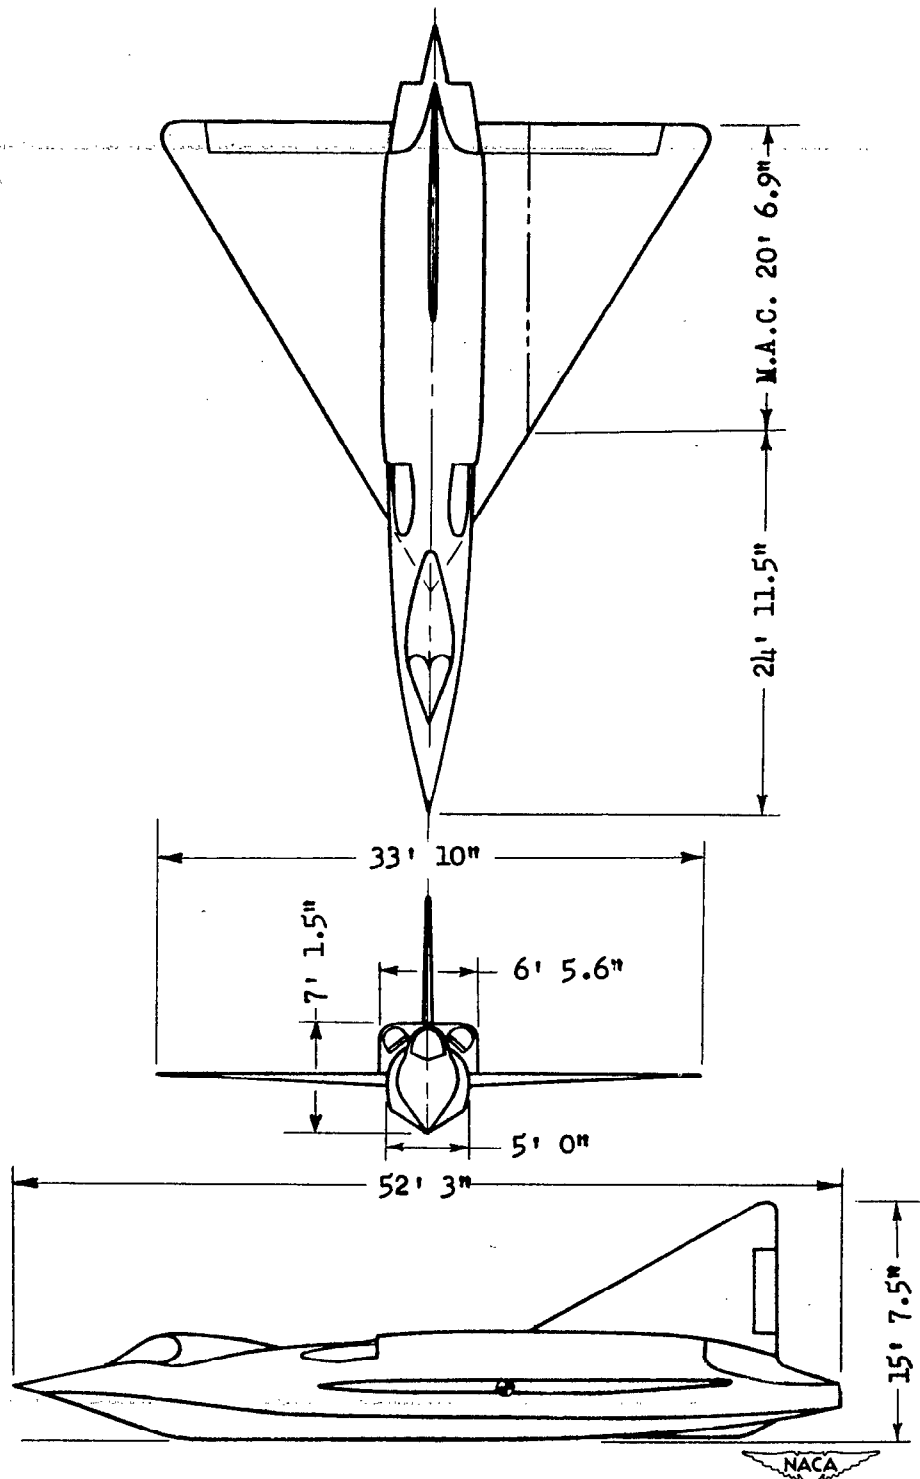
Three-view drawing of the Y2-2 airplane. Dimensions are full scale.
